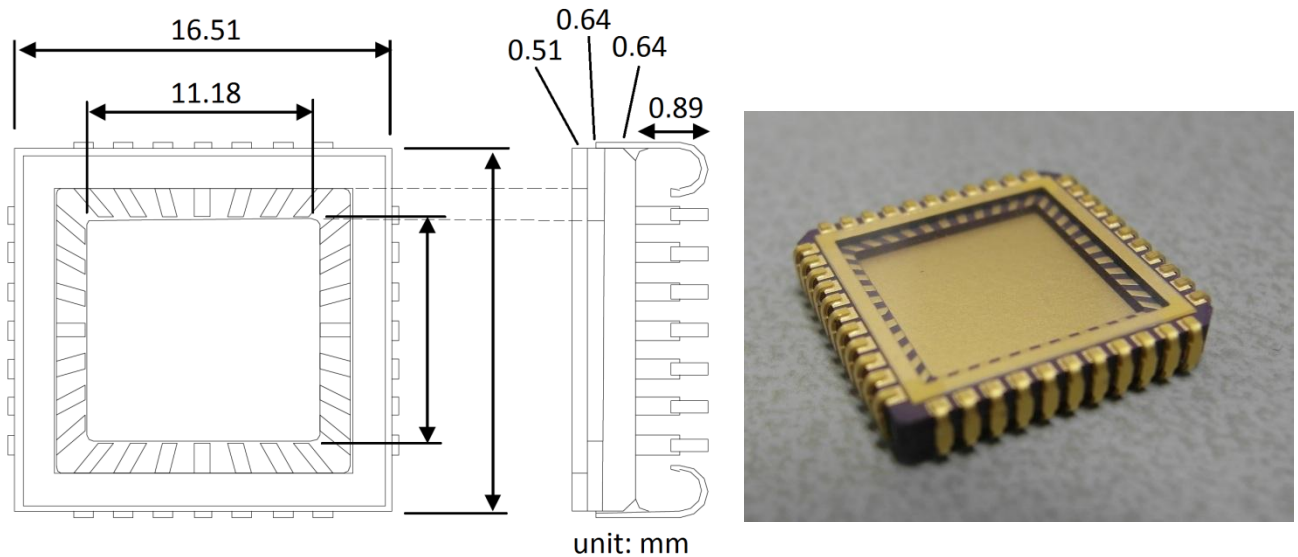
a) Chip carrier dimensions sketch [7]. b) Photo of the used chip carrier.
